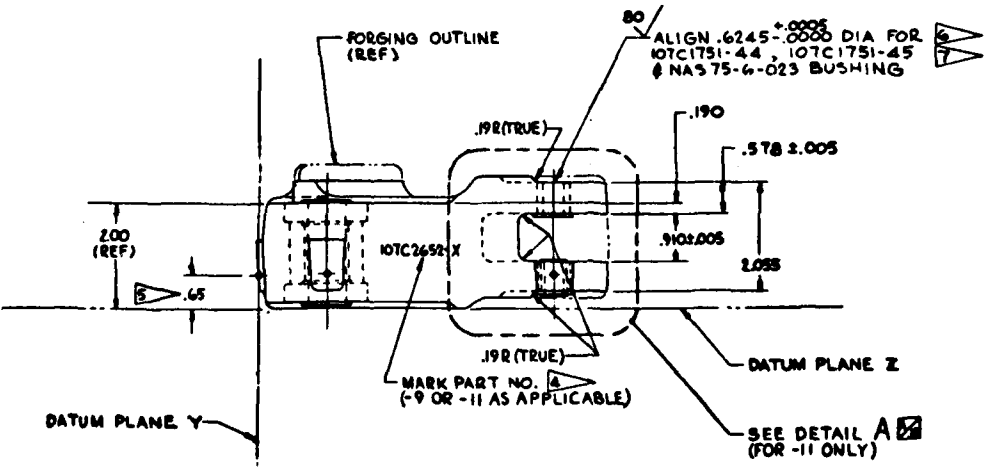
Drawing 107C2652, Lateral Differential Bellcrank Assembly (Sheet 3 of 3)
